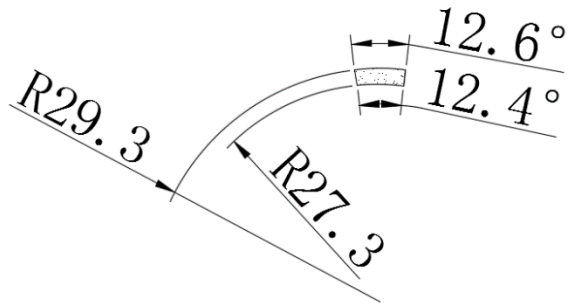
PM dimensions for 12-stator-slot SPM-FRPM machines.
